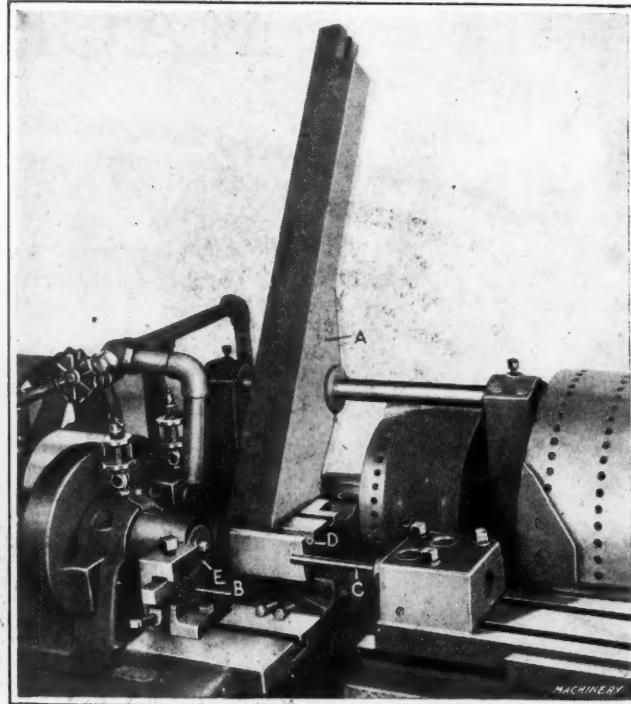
Five-eighth-inch Automatic Screw Machine equipped with a Feeding Magazine for delivering Bolt Blanks to the Chuck for performing a Shaving Operation on the Head
